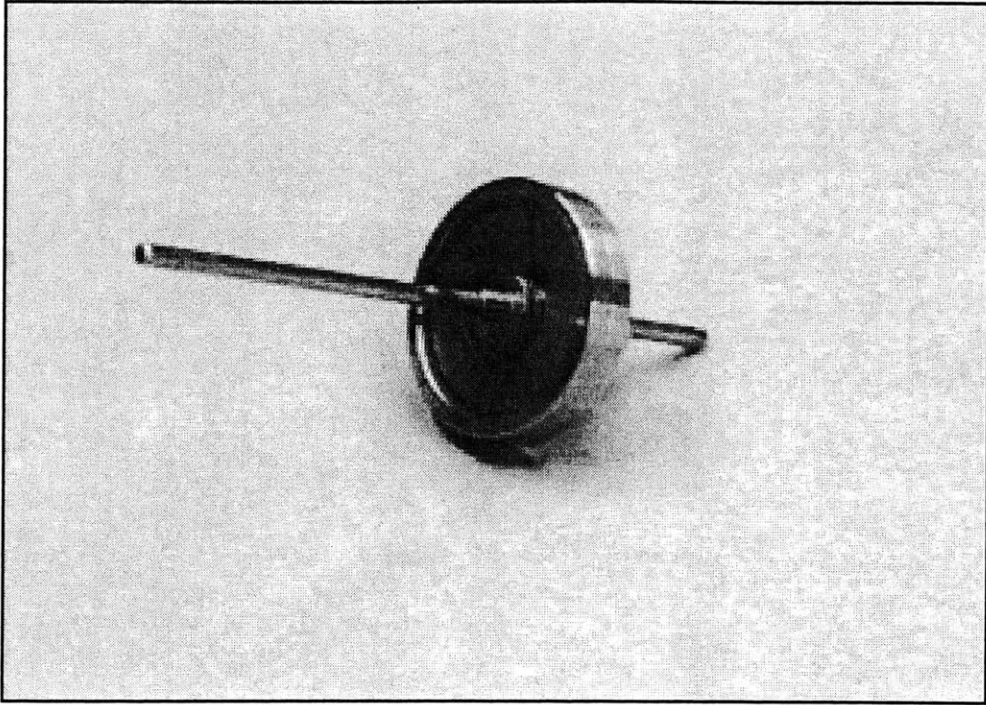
Photograph of Upper Multi-Leaf Flexure Assembly
